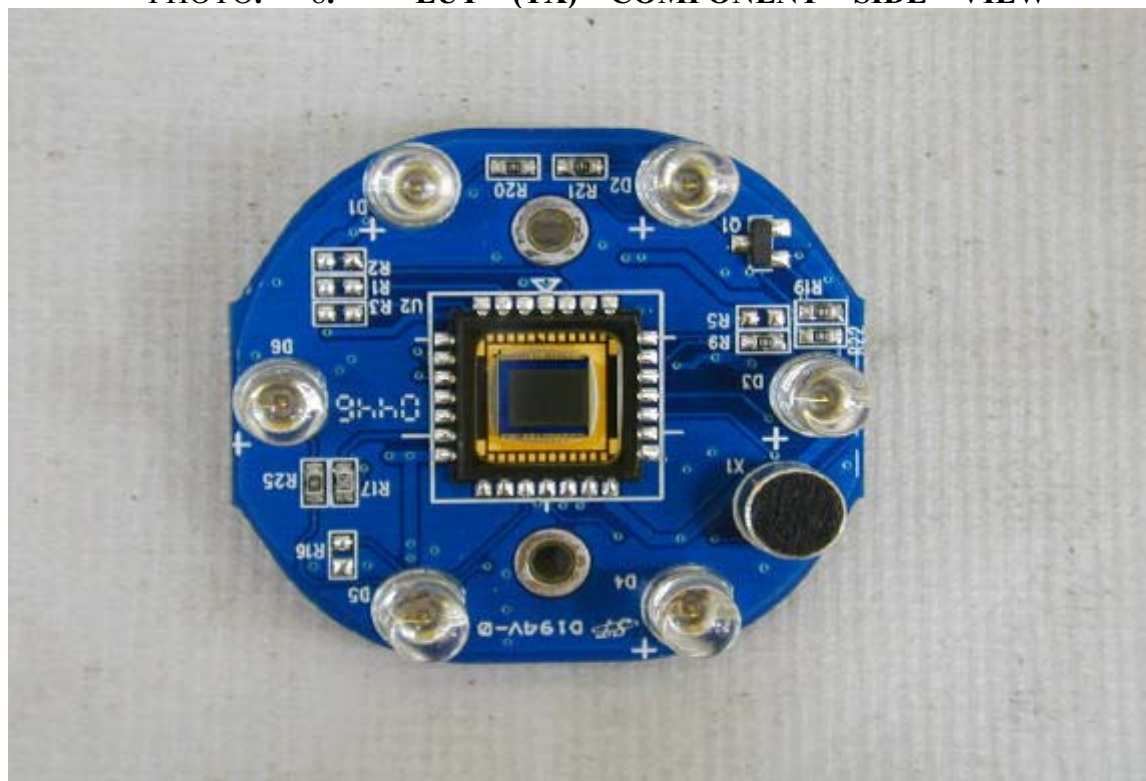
EUT (TX) COMPONENT SIDE VIEW
